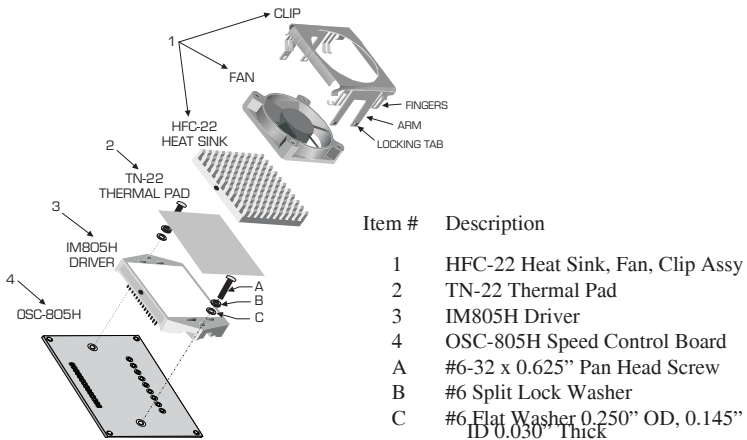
HFC-22 Heat Sink, Fan and Clip for IM805H/OSC805H Assembly
